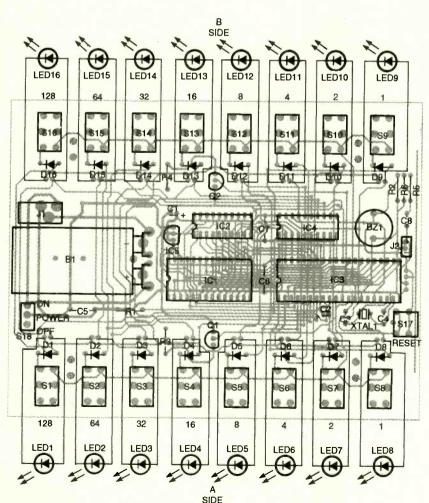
PARTS-PLACEMENT DIAGRAM. Solder the 1N914 diodes first, then the resistors and capacitors.
